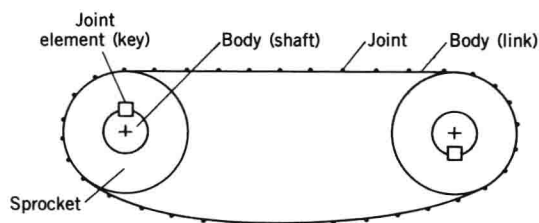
Chain-sprocket drive system showing body and joint elements.
